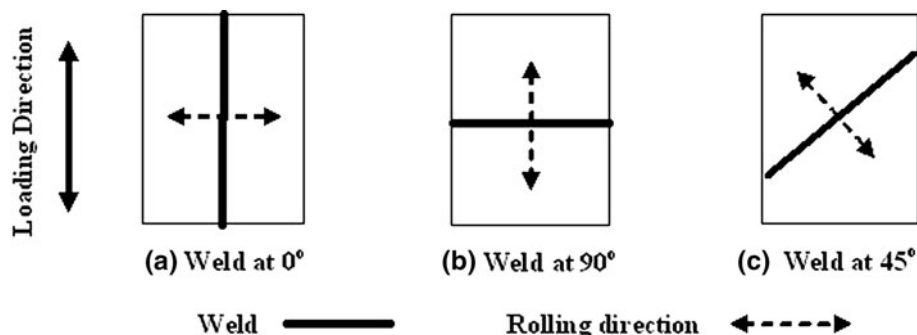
Schematic showing weld and rolling directions in the TWB specimens relative to the loading direction
